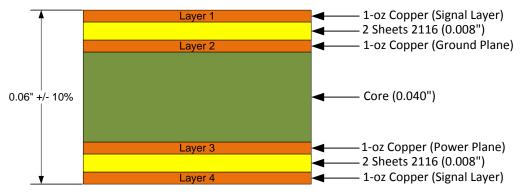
Typical Four-Layer PCB Stack with Routing Assignments
